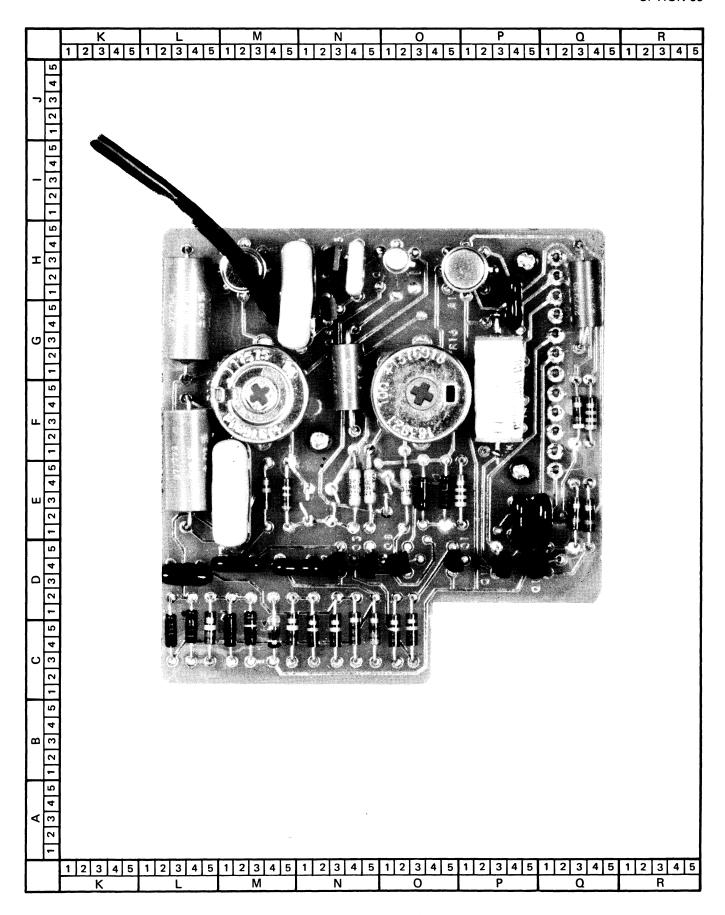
DC EXTERNAL REFERENCE P/C ASSEMBLY
